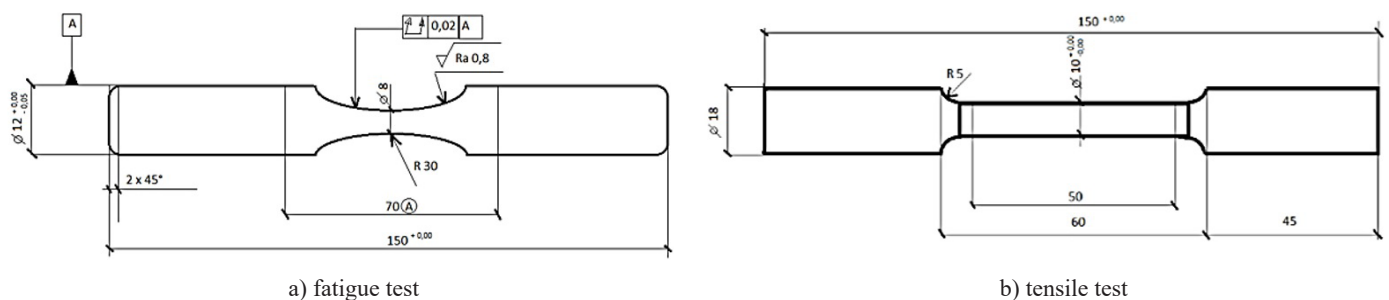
Shape and dimensions (mm) of the experimental specimens
